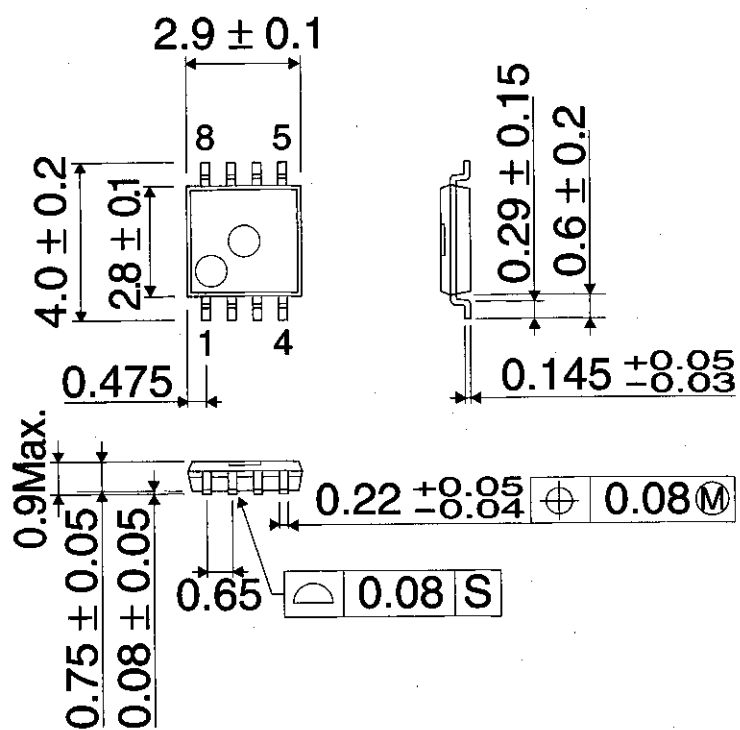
Outline Dimensions MSOP8(BR9020RFVM-W)
